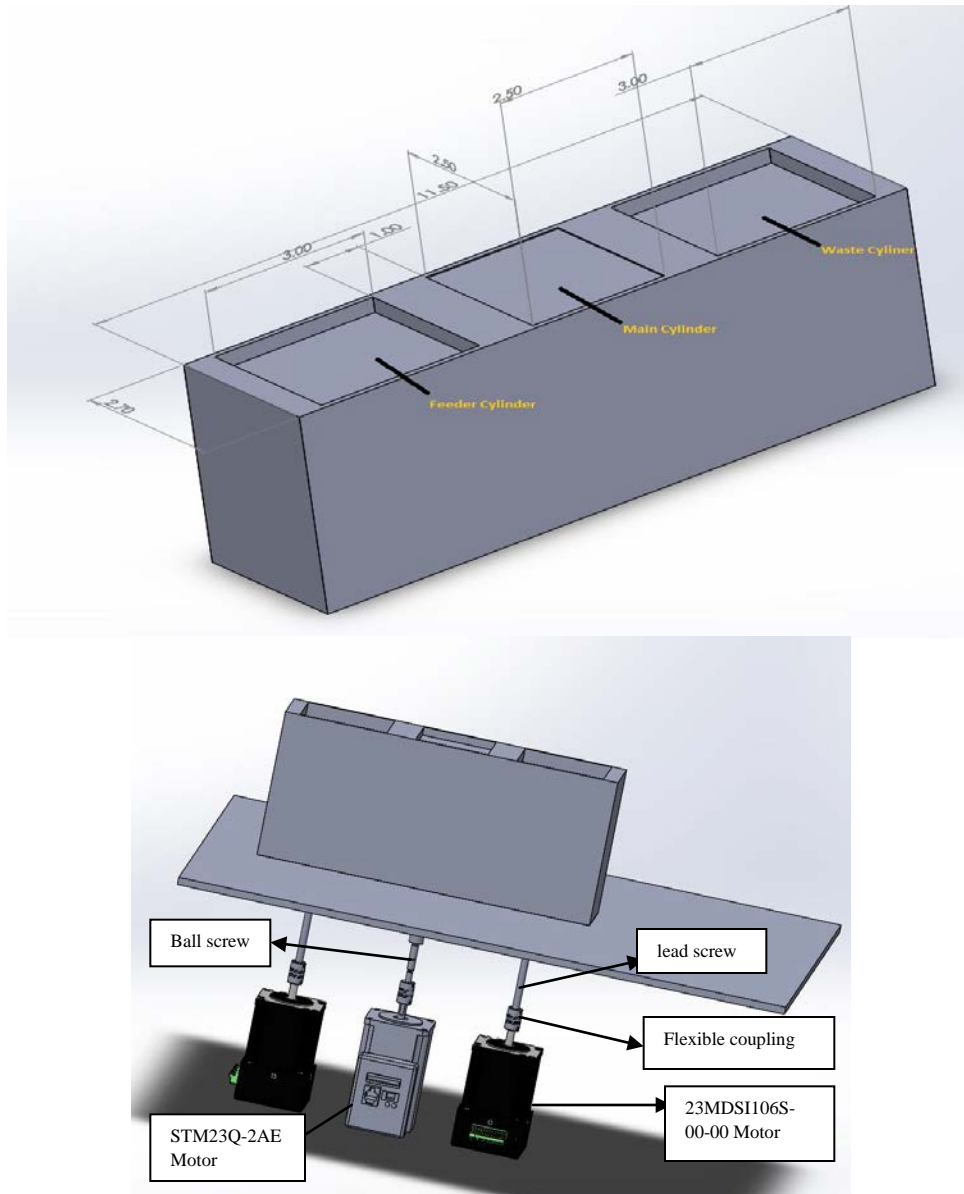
a)CAD model with dimensions of the main, waste and feeder cylinder and piston arrangements b)CAD model of the actuation assembly for the cylinder and piston arrangement
